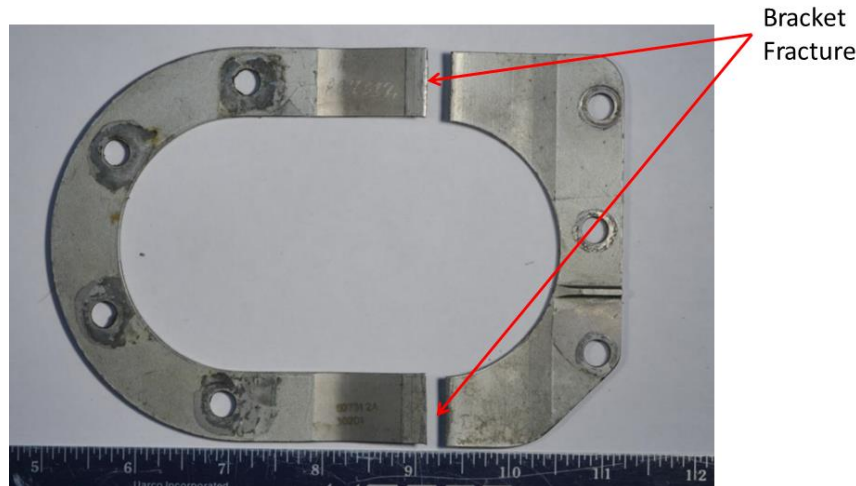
Fuel Oil Cooler Aft Mounting Bracket, Fractured Two Locations
